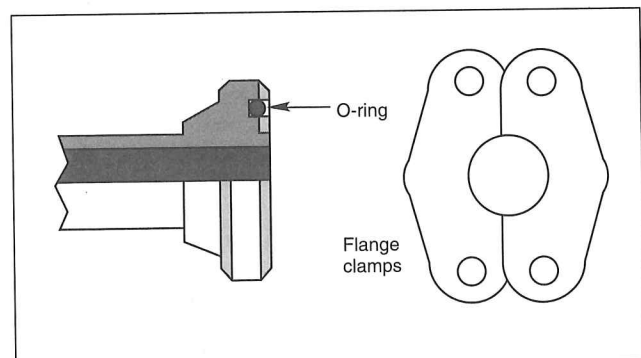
An elastomeric O-ring in a flange fitting mates with the flat machined surface of a pump, valve, or housing.
